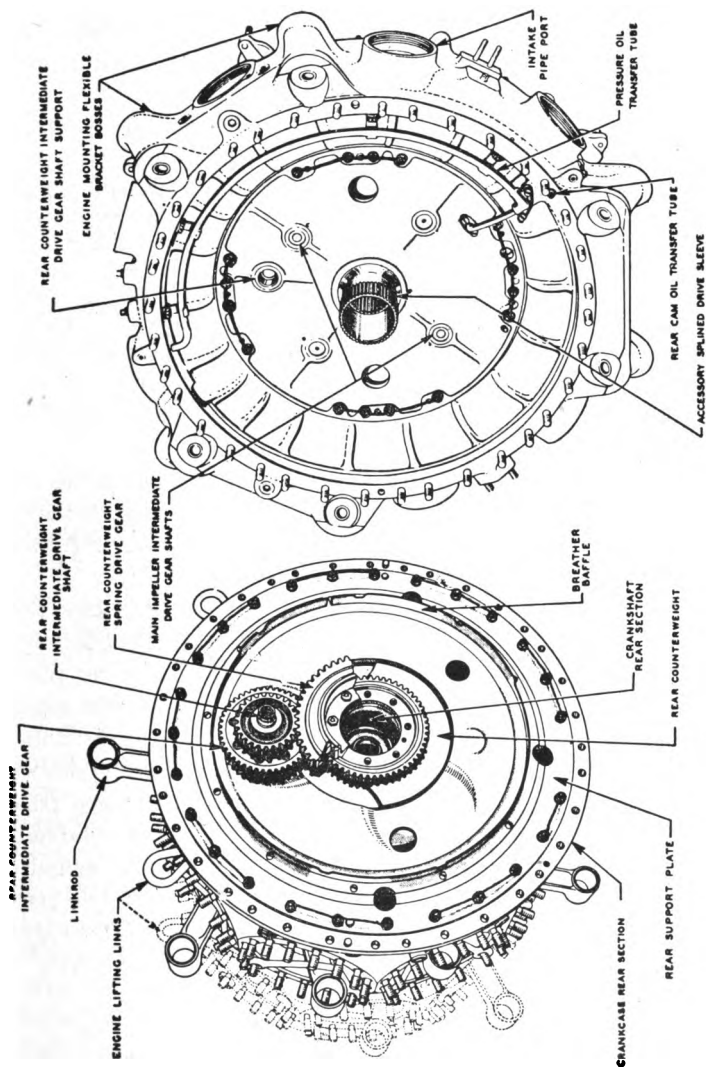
Rear of crankcase rear section with rear support plate and front of main supercharger section.
